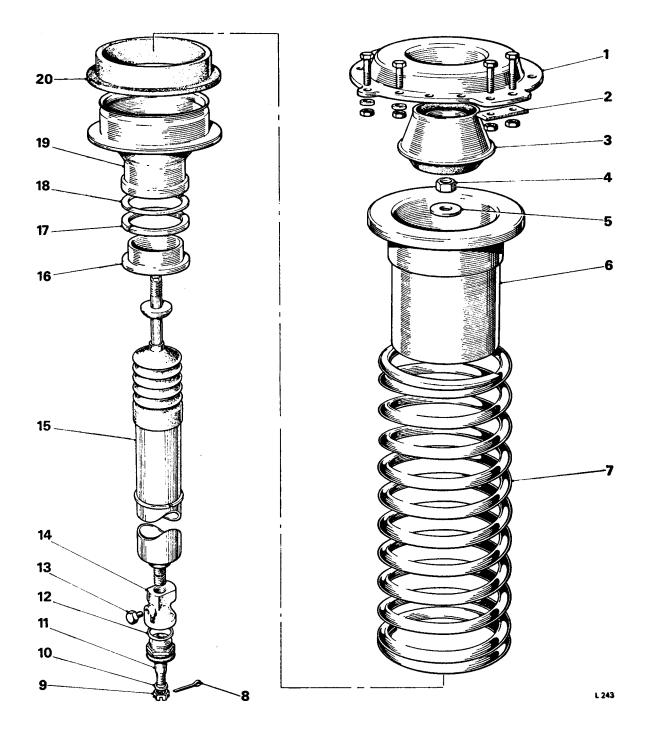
EXPLODED VIEW FRONT ROAD SPRING
